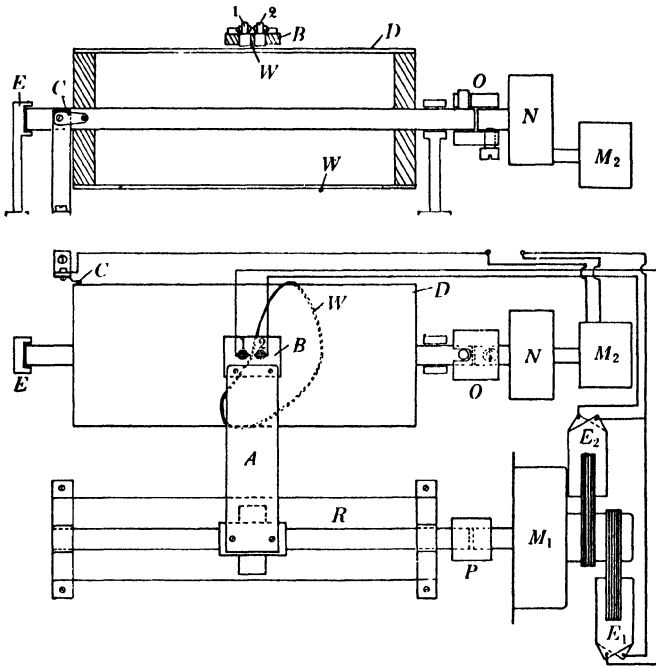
Section-elevation, plan and wiring diagram of time-cycle process controller.
